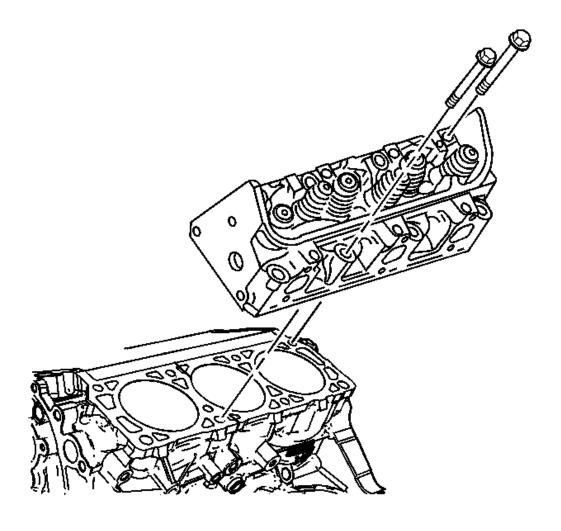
Removing/Installing Cylinder Head Courtesy of GENERAL MOTORS CORP.
